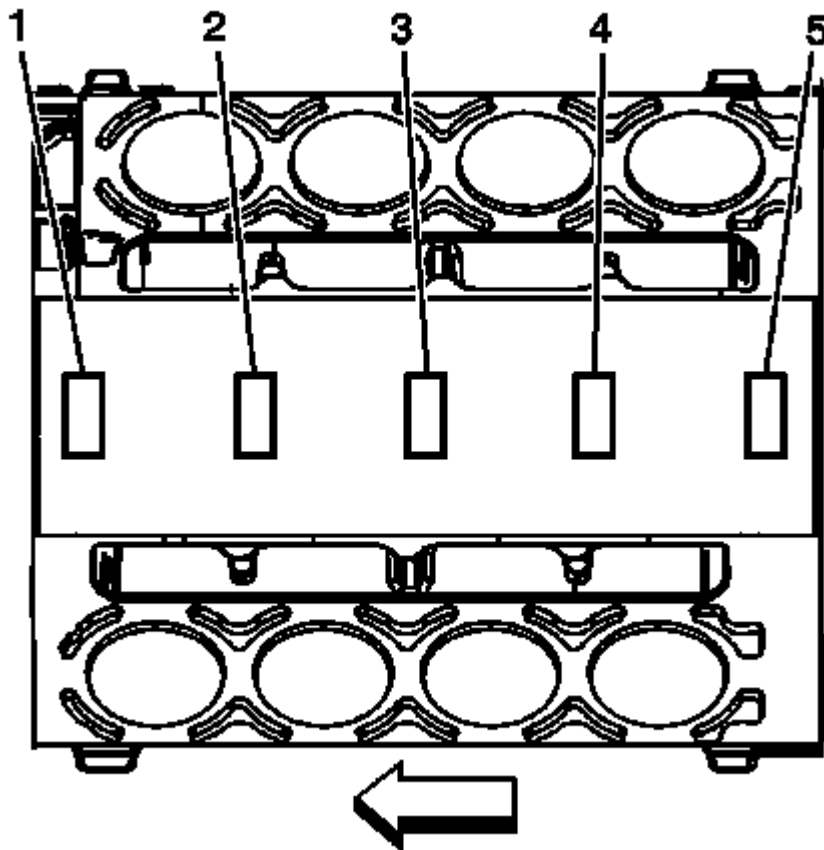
Identifying Engine Block Camshaft Bearing Bores
